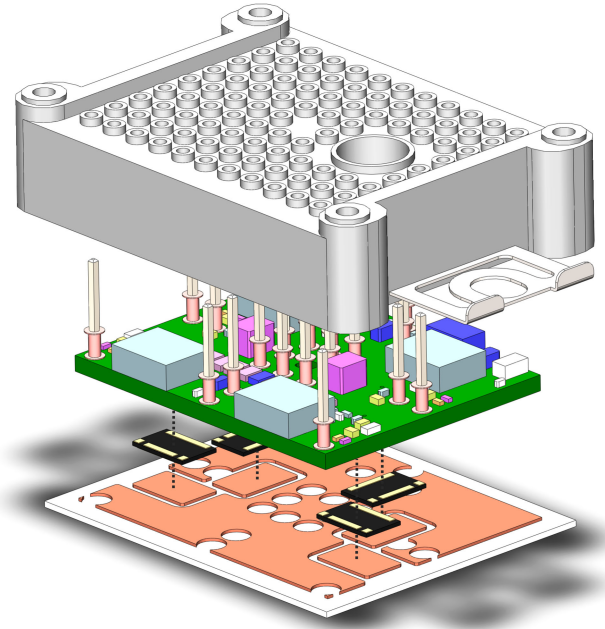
3-D rendering of the GaN eHEMT power module stack assembly. DBC dimensions are 36×28 mm.
